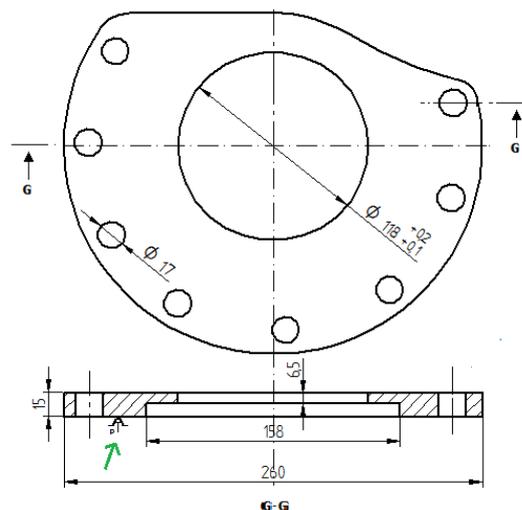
Flange mounted on a pneumatic plate during the drilling of 8 holes
